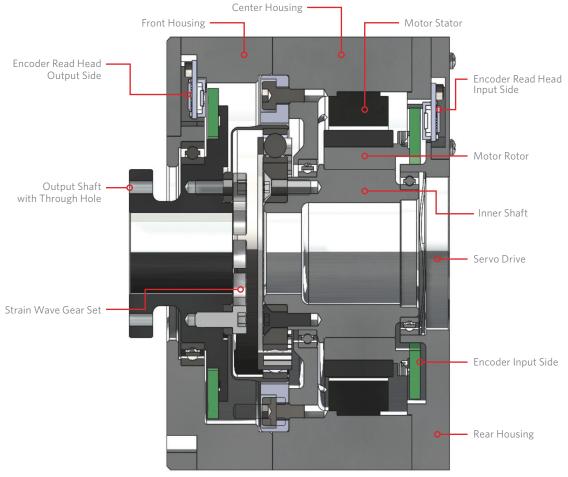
below shows an alternative approach using two absolute inductive encoders. In similar construction to the joint in Figure 2, there is an encoder on the motor side (input) and the output side after the gear. This assembly also includes an electromechanical brake for holding while power is off.
